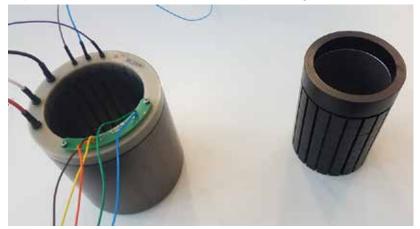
Stator with screwed-on Hall circuit board and rotor with glued-on magn. encoder channel
